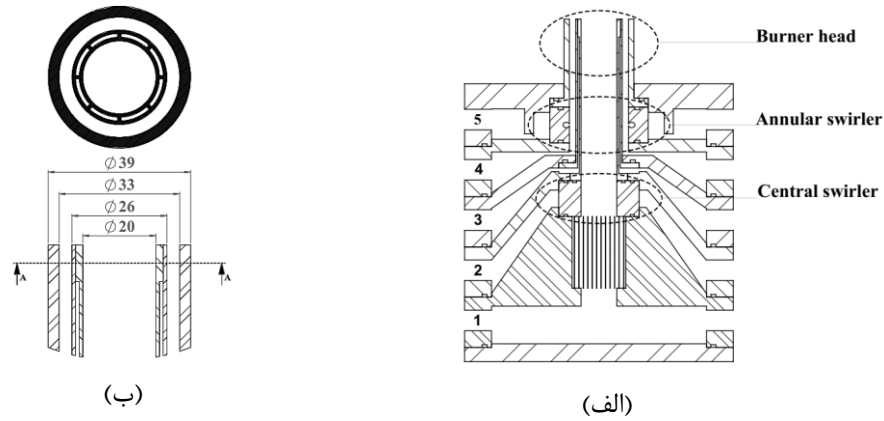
(a) Schematic drawing of the ADSB; (b) Burner head
